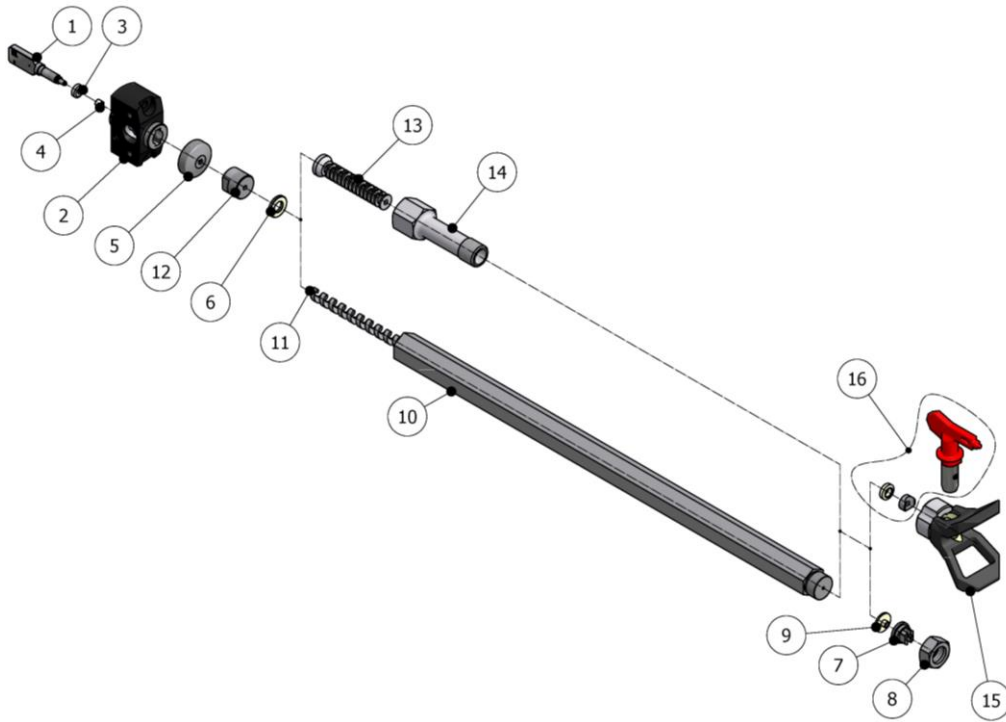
(OPTIONAL) Static Mixer Assembly, Exploded View
